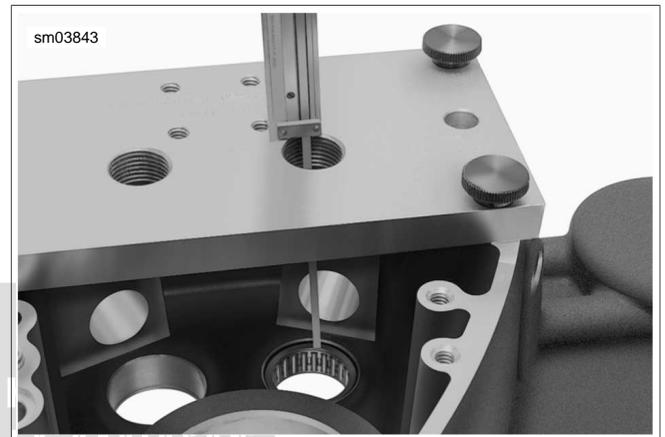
Measure from Top of Support Plate to Edge of Needle Bearing
